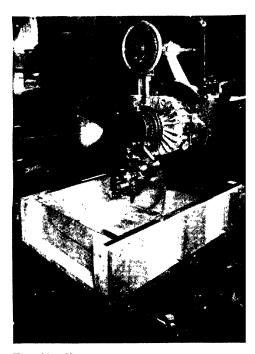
Valve-body corebox being cut of pattern milling machine
